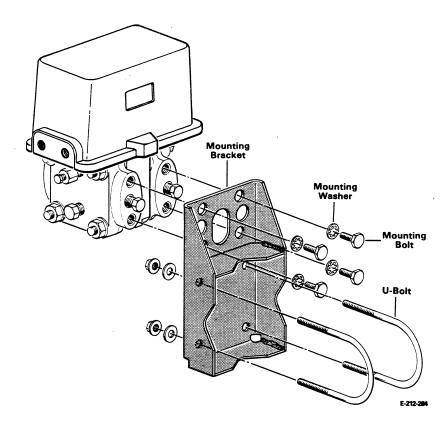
Assembling Optional Mounting Bracket Kit, Accessory (146), on Transmitters with Pipe Adapter Connections
